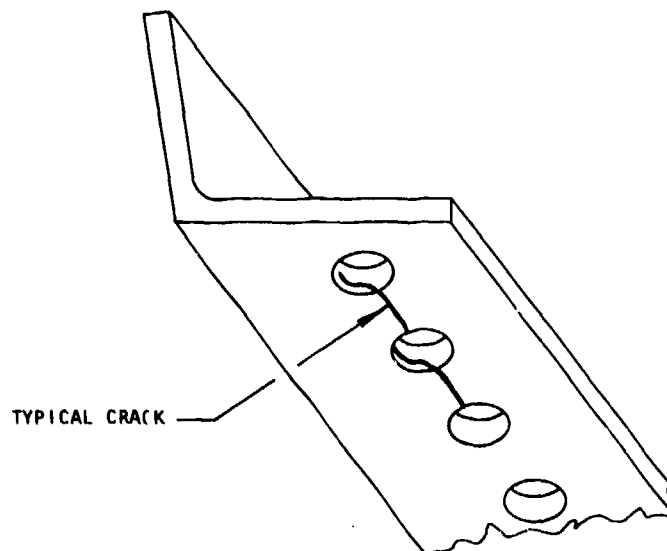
FRONT SPAR LOWER CHORD FASTENER ROW CRACKING
